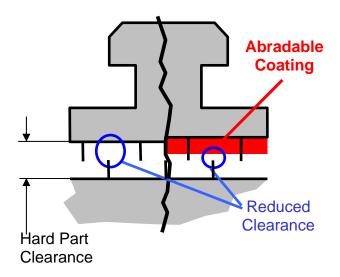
TYPICAL ABRADABLE SEAL ARRANGEMENT
